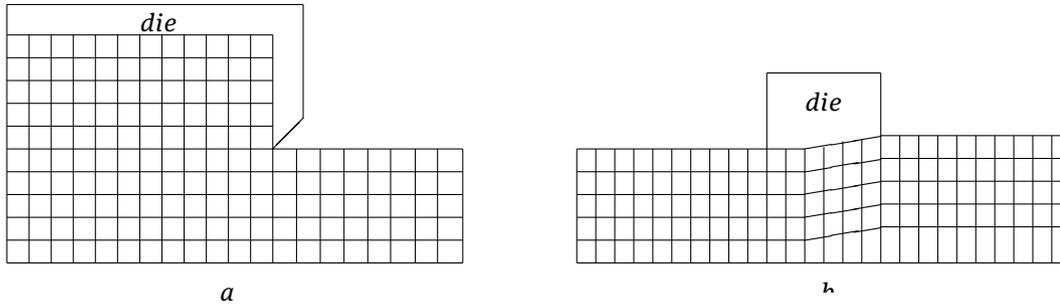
Finite element meshes for the example extrusion and drawing pr
